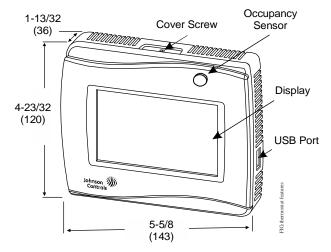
Thermostat Controller Shown with Occupancy Sensor, Dimensions, in. (mm)
